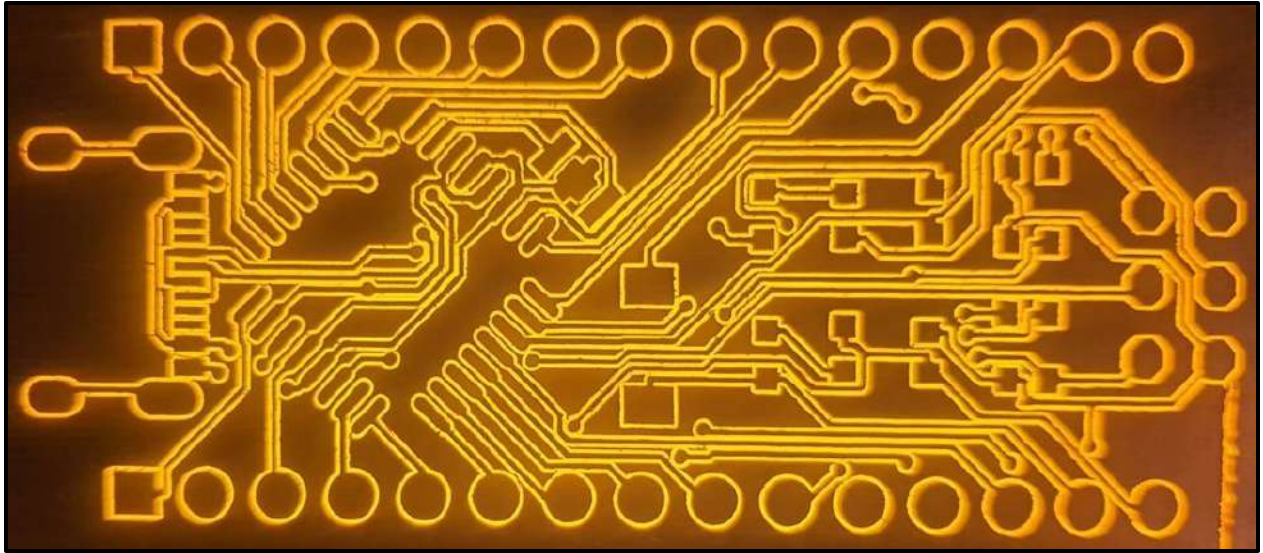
Arduino Nano Board is Designed through CNC Milling Machine
